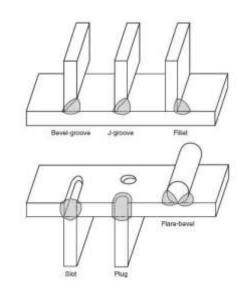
Types of welds that may be made with a basic T-joint.
